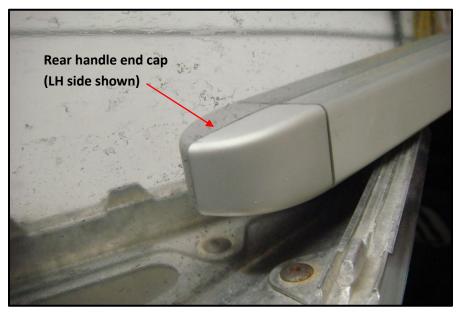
Rear handle end cap-(shown on the exterior of the LH side of tunnel)
